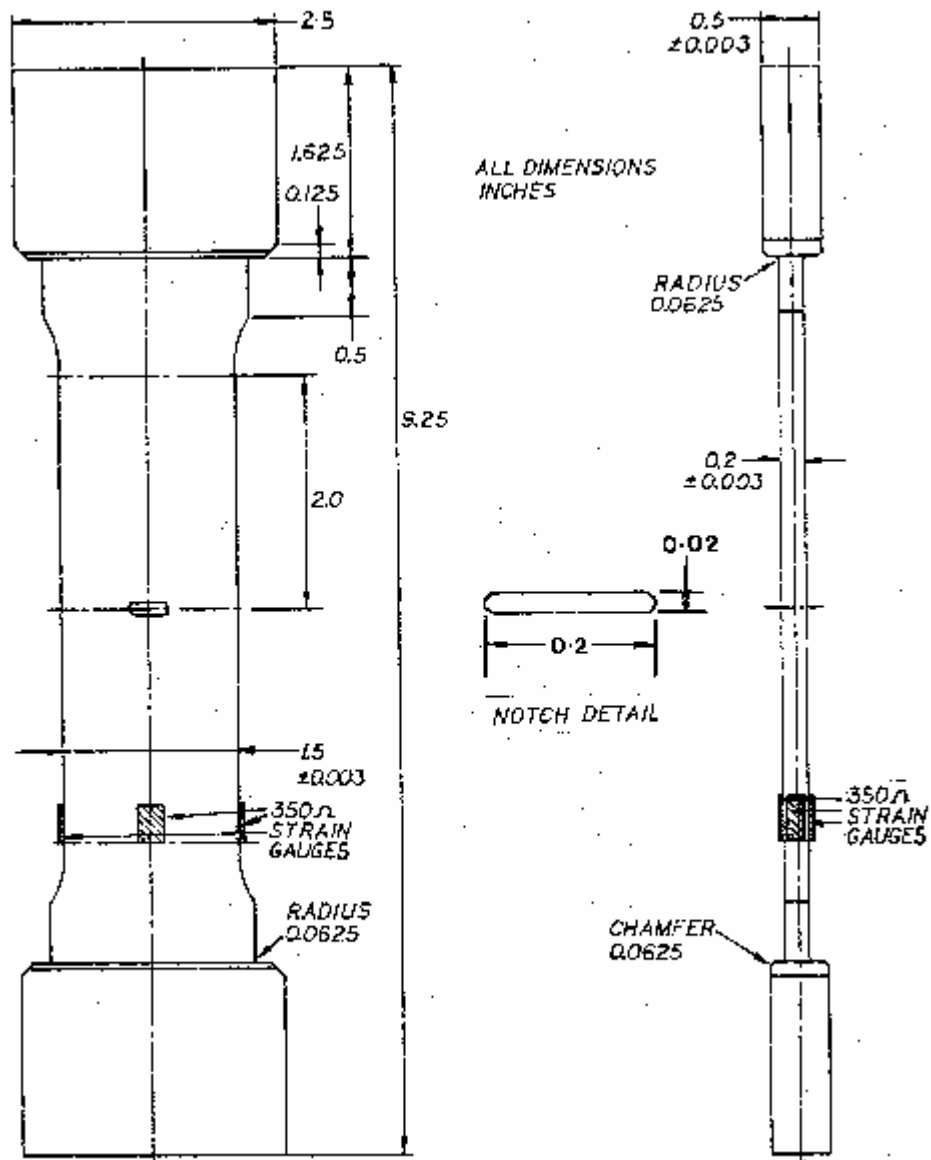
Fixed End Centre Crack 7075-T651 Specimen
